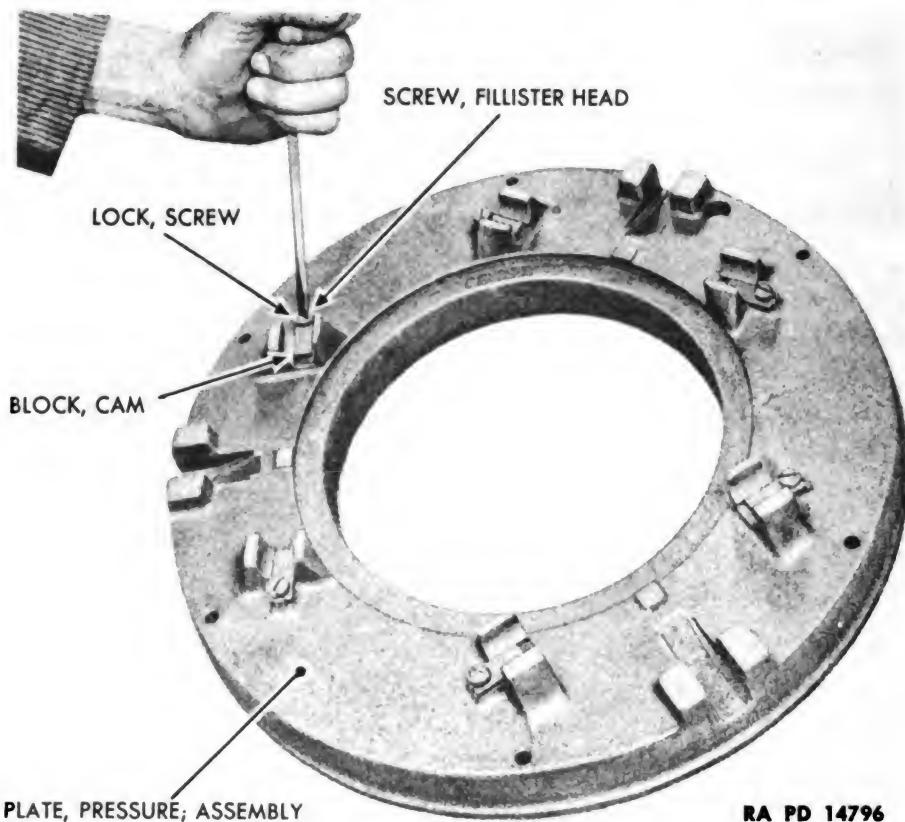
Cam Block Removal from Pressure Plate Assembly
